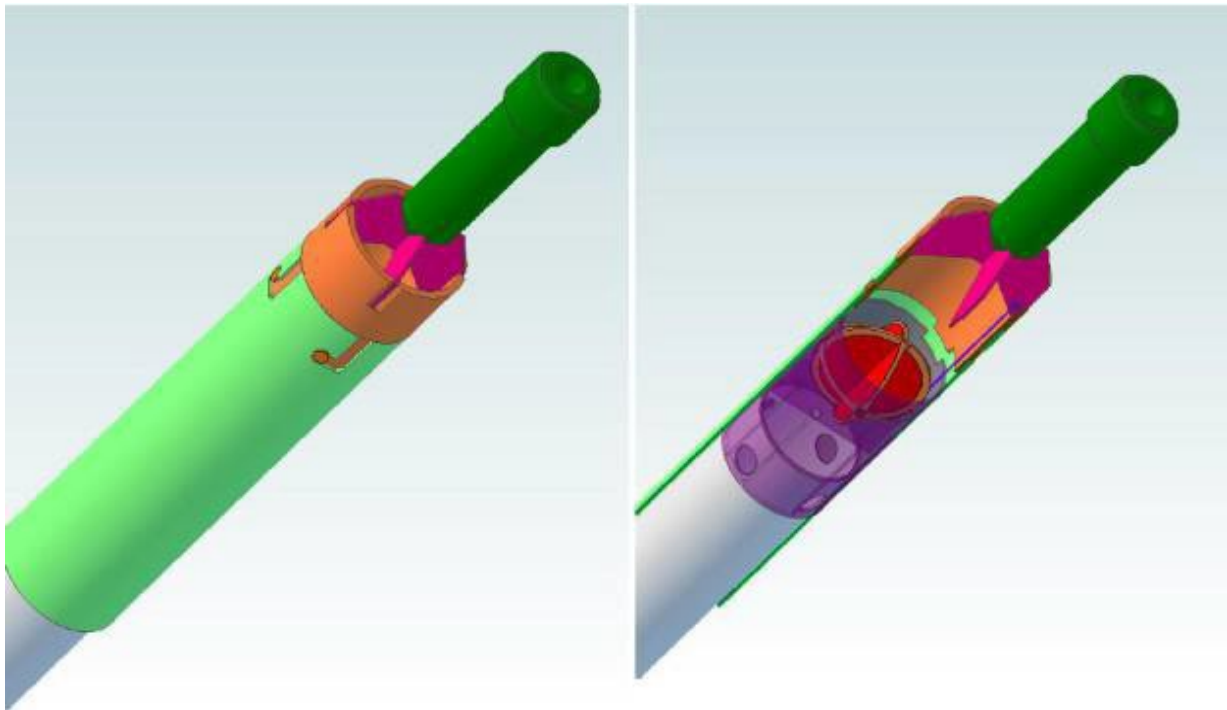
Valve At The Top Of The Stinger Sampler Shelby Tube
